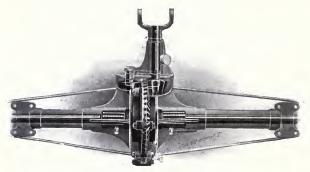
Rear-Axle Construction on Maxweii Car, Snowing Roller Thrust to Relieve Strain on Large Driven Bevel Gear of Differential Maxwell-Briscoe Motor Company, Tarrytown, N. Y.
